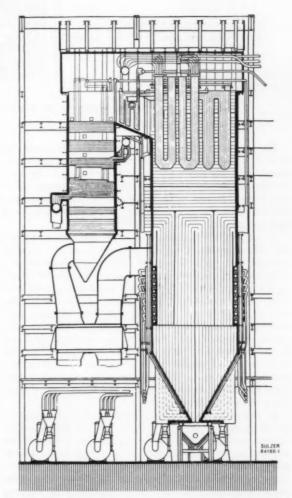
Section through a Sulzer Monotube steam generator for supercritical pressure; 1,820,000 lb per hr, 5120 lb per sq in., 1200 F, with double reheat to 1050 F, (built under license by Combustion Engineering Inc., N.Y.)
